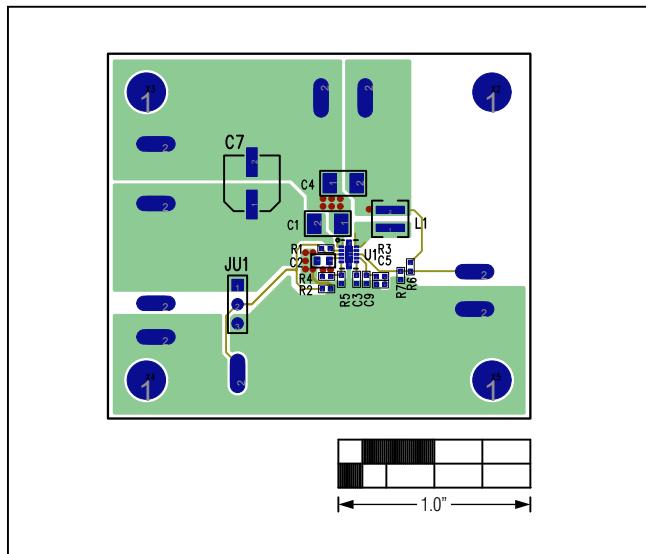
MAX17542G 3.3V Output EV Kit PCB Layout—Component Side
